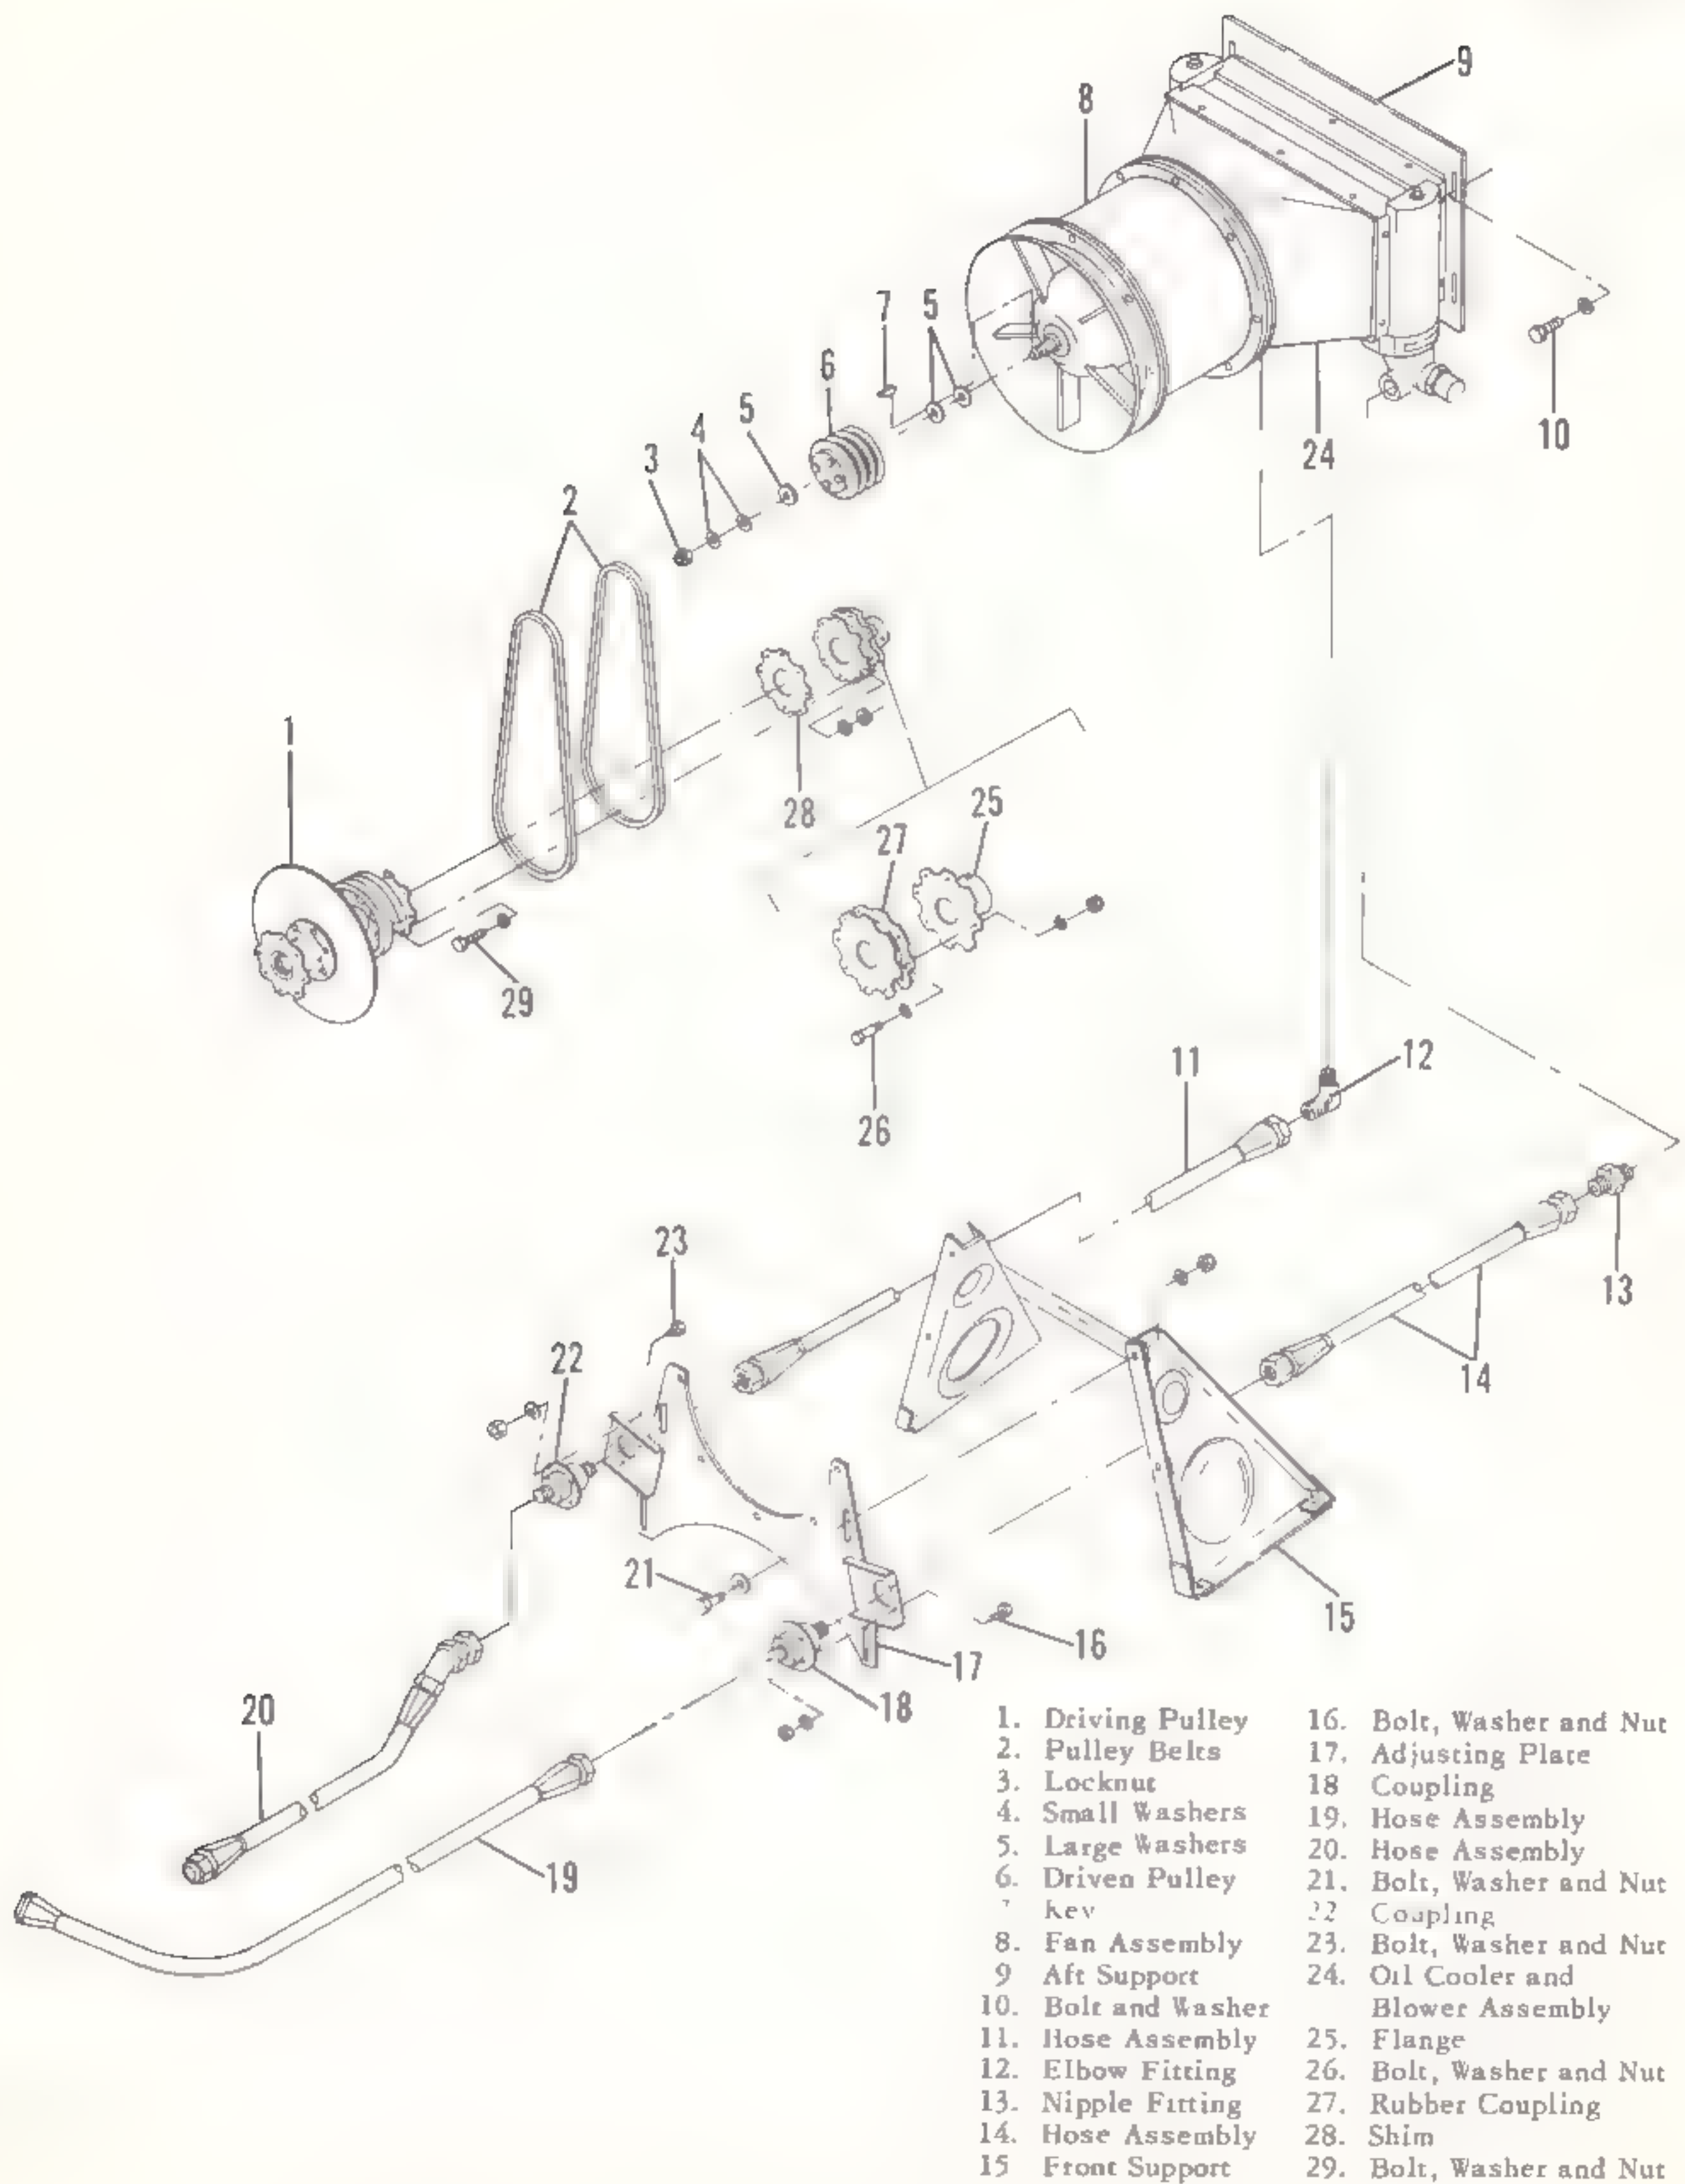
Oil cooler and blower assembly (helicopter serial No. 54-892 and subsequent)
